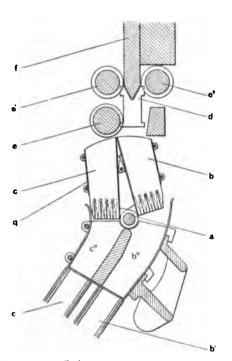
Stringertype; gear for distributing matrices to magazines. Cross-section.
